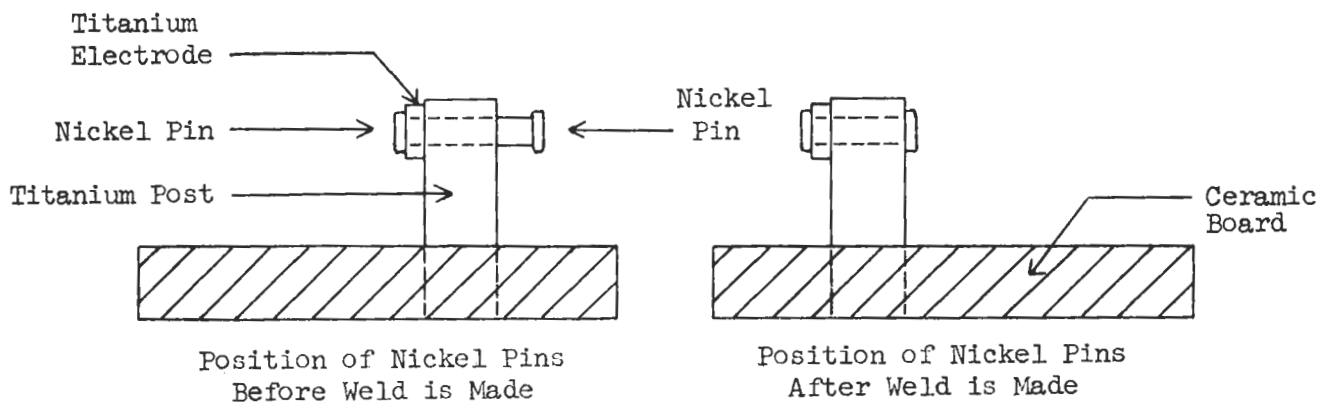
Position of Nickel Pins Before and After Weld is Made
